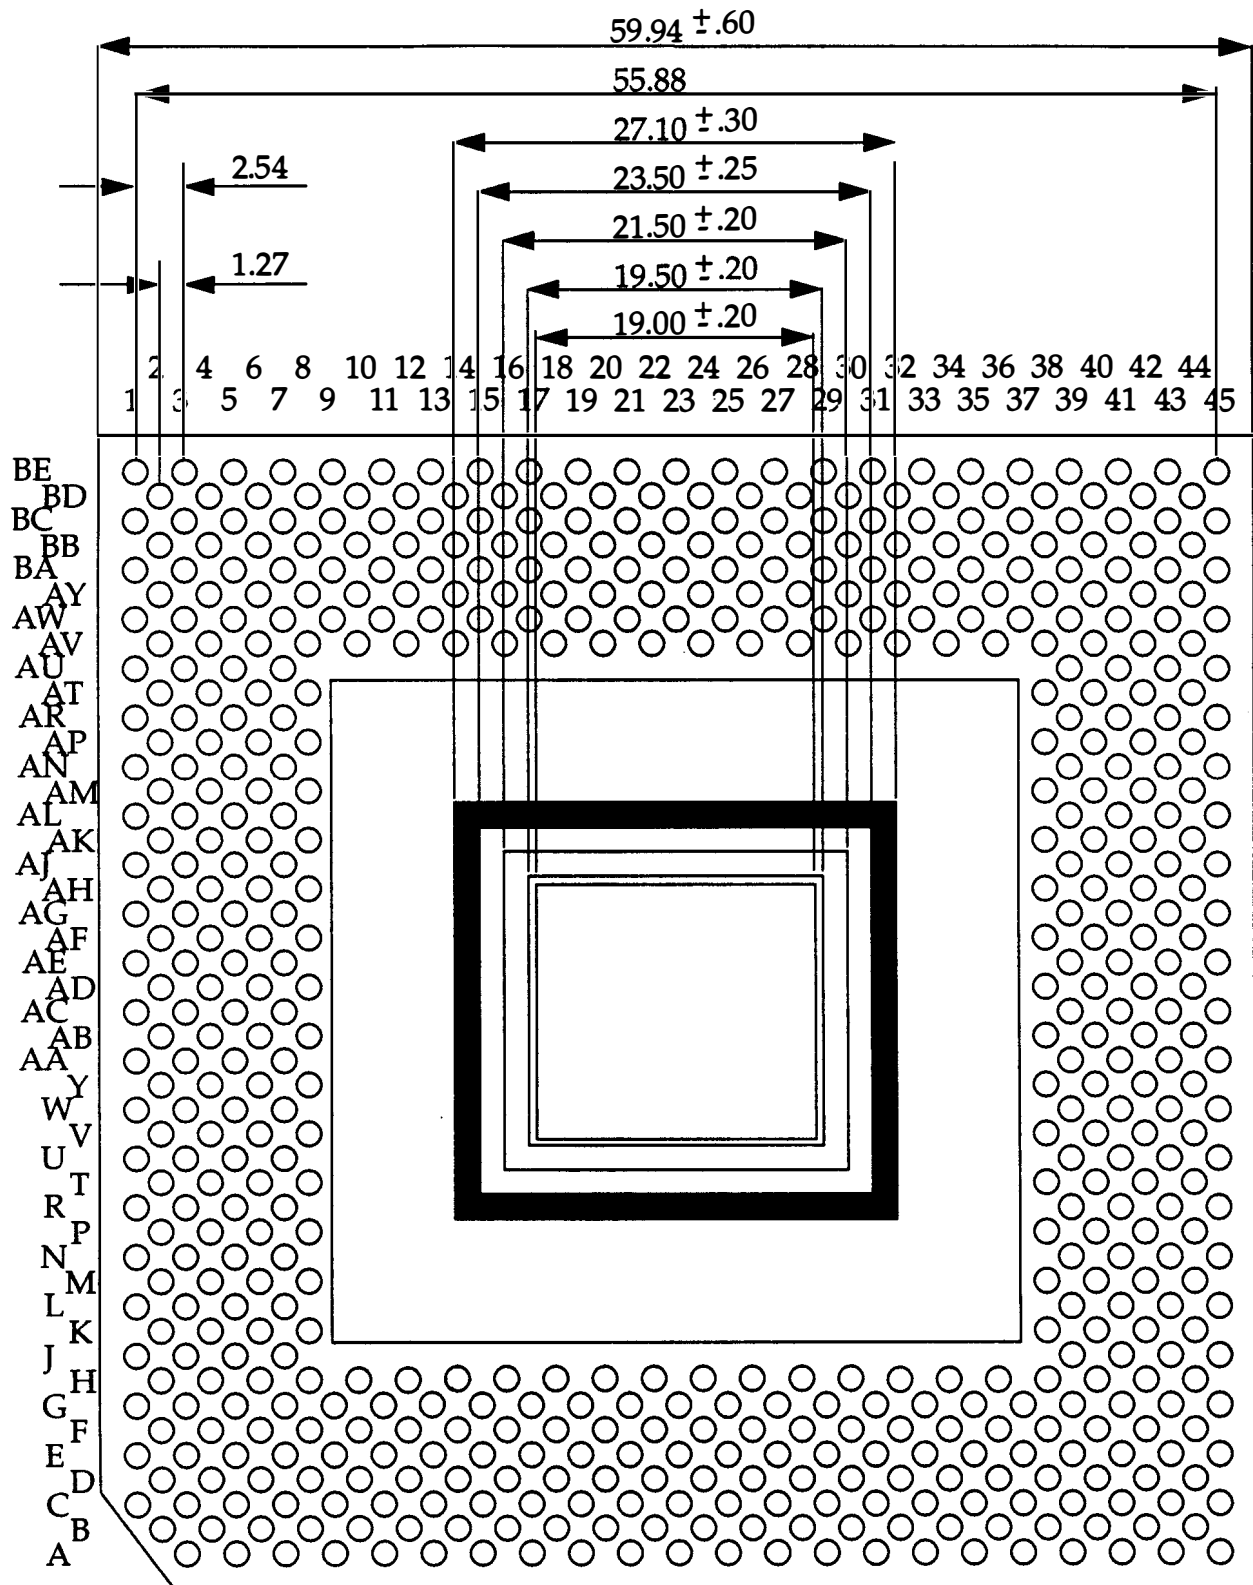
R8000/R8010 Package Dimensions -- Top View
